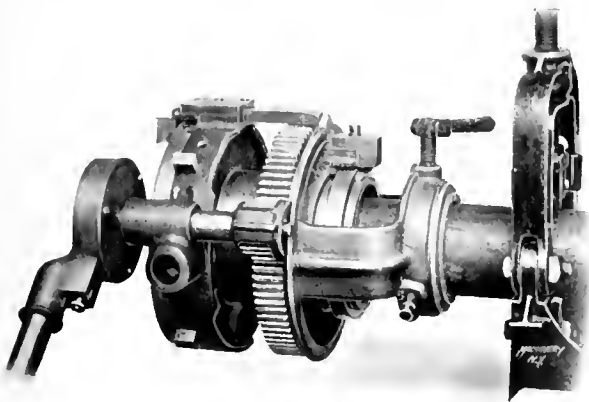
Buckeye Die-stock for Cutting Taper Pipe Threads up to 4 inches in Diameter.
